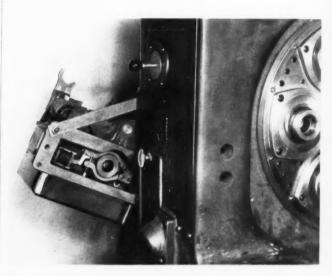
Small solenoid unit has replaced cam device for operating brake on automatic chucking machine
